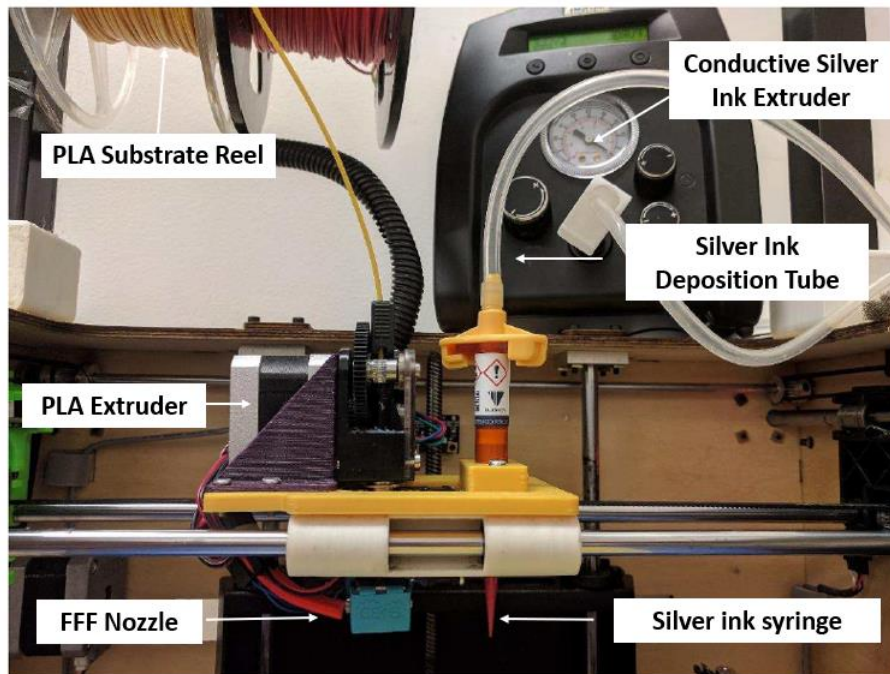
Assembled 3D printer setup with dual-extruder deposition heads and the extension components.
